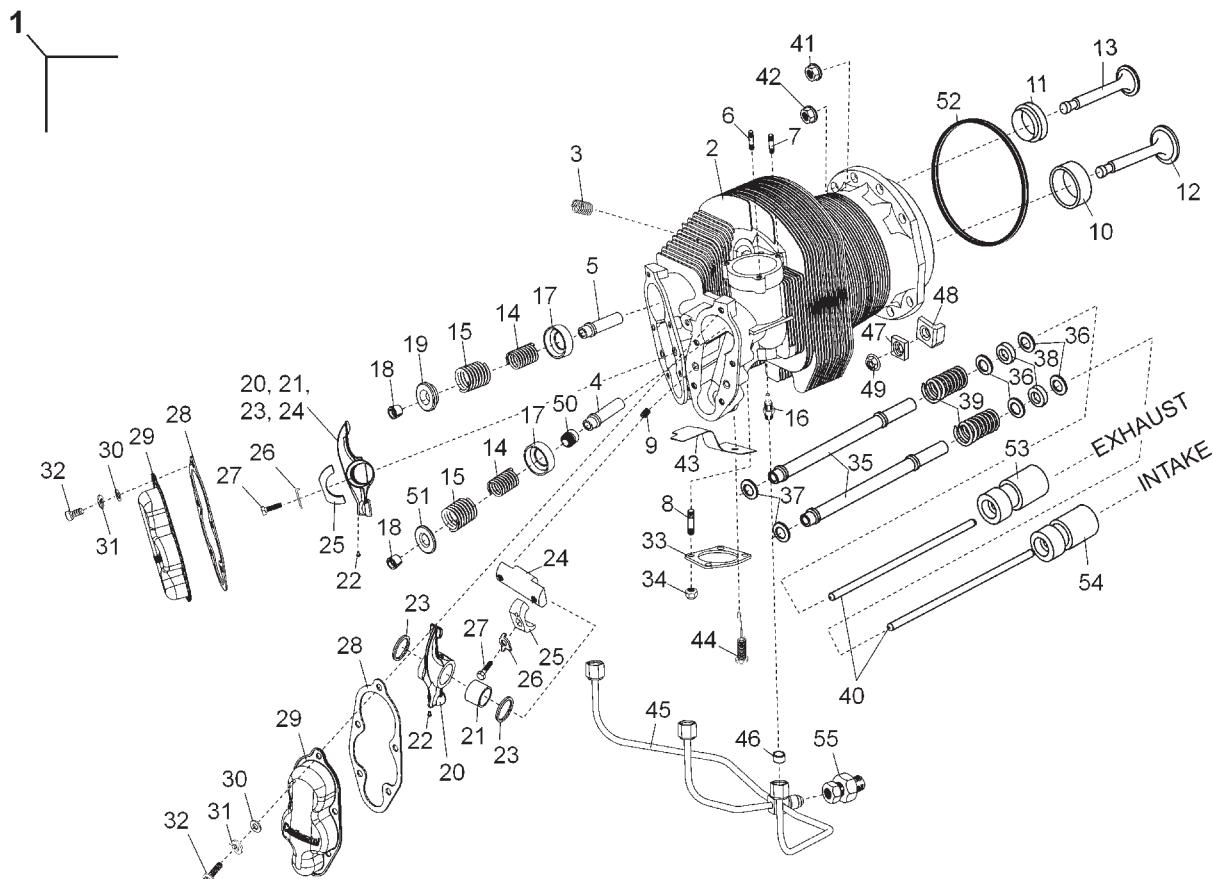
Crossflow Cylinder Assembly G N P R
